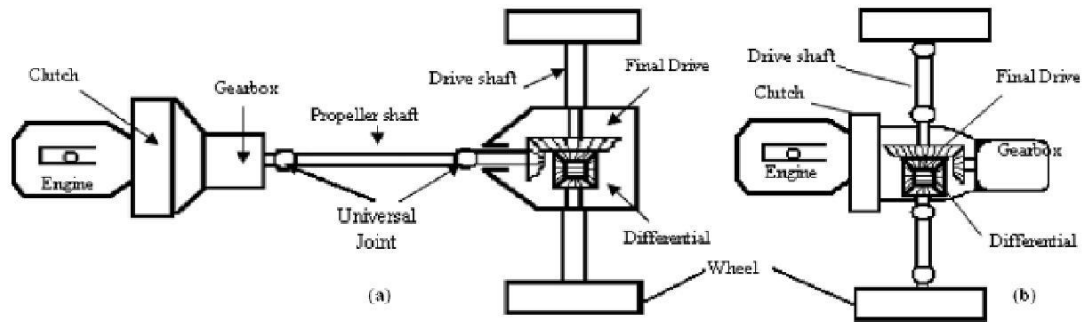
Elements of Power Transmission System (a) Rear Wheel Drive (b) Front Wheel Drive.
